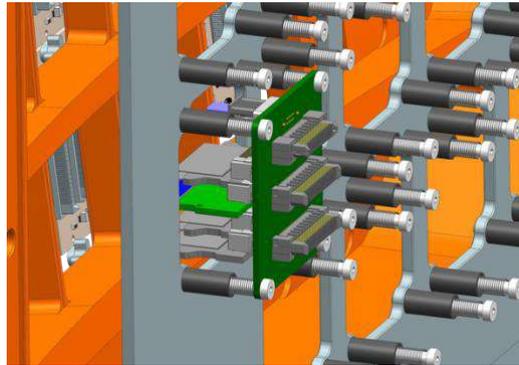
Rack interface plate with spring-loaded stand-offs and single TM Interface Board attached.
